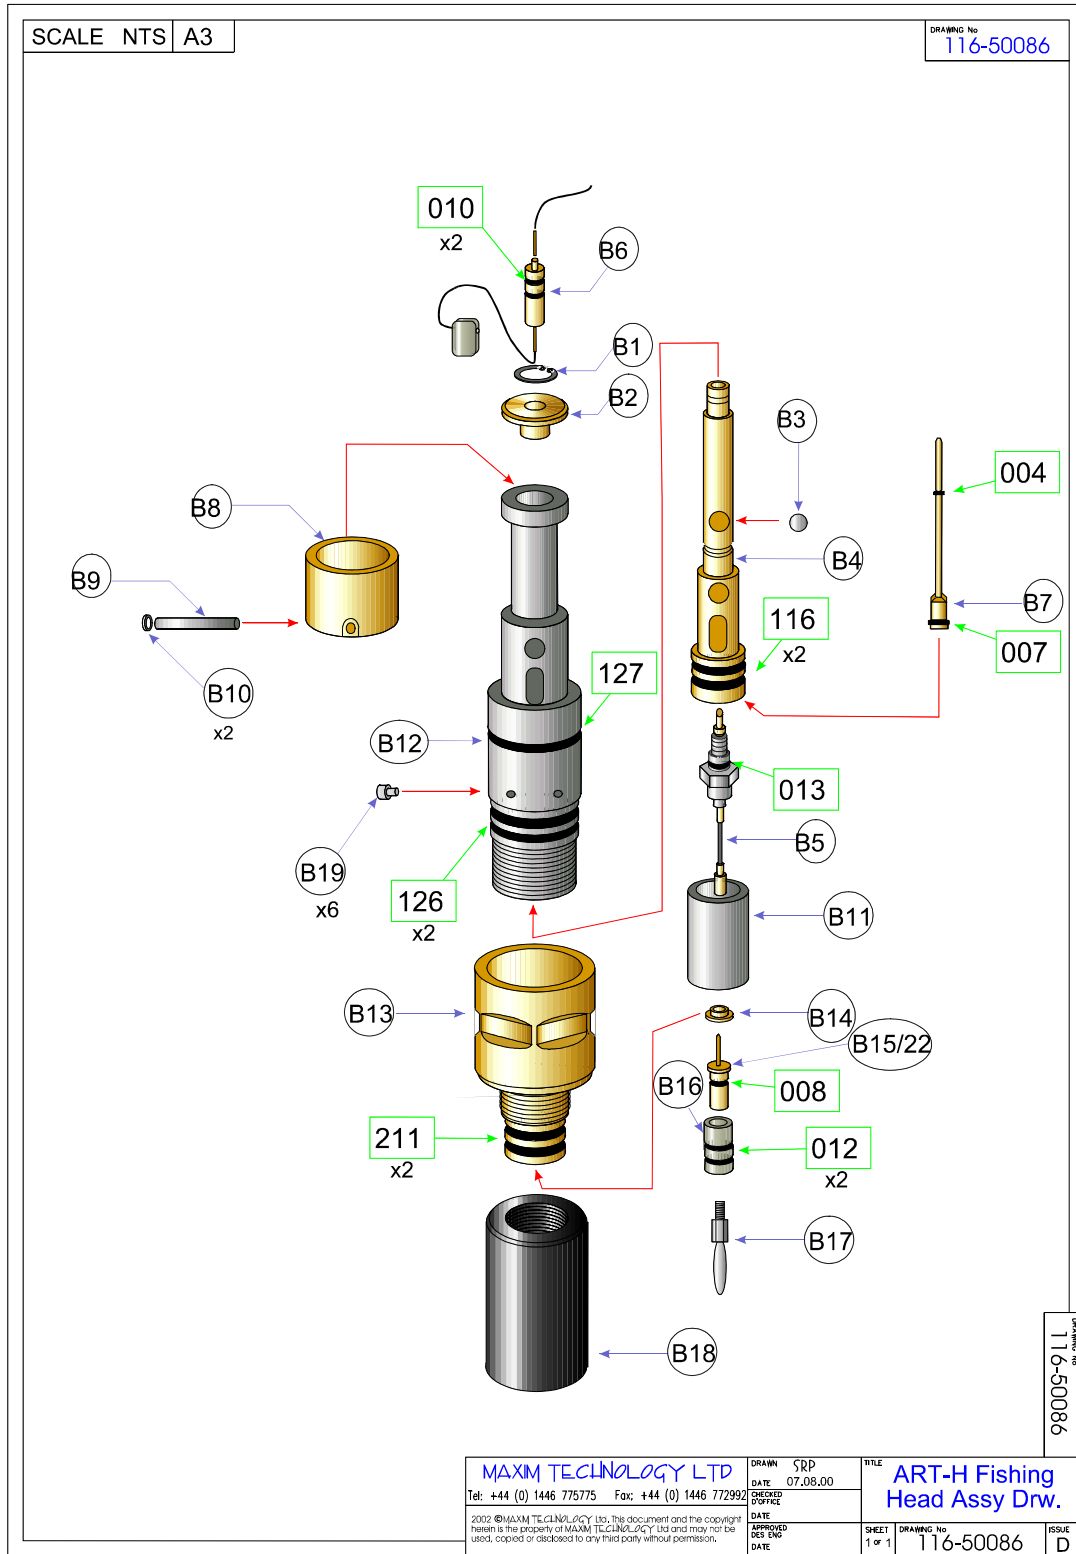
Exploded Assembly Drawing, Fishing Head, ART-H – 116-00086-D
